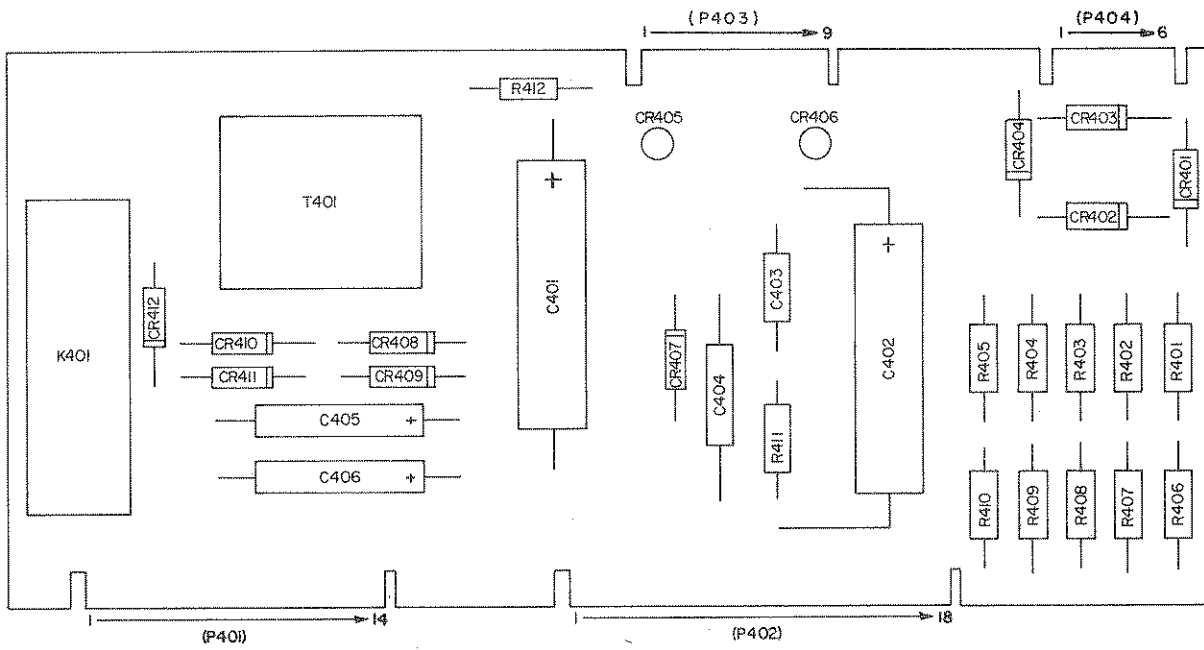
COMPONENT LOCATION, ASSEMBLY A4.
